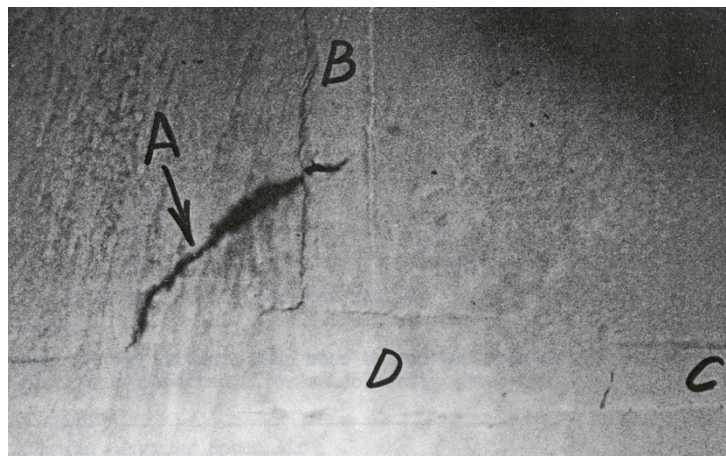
Dye-penetrant testing of stress corrosion crack on vertical weld in Tank 16 [15].
